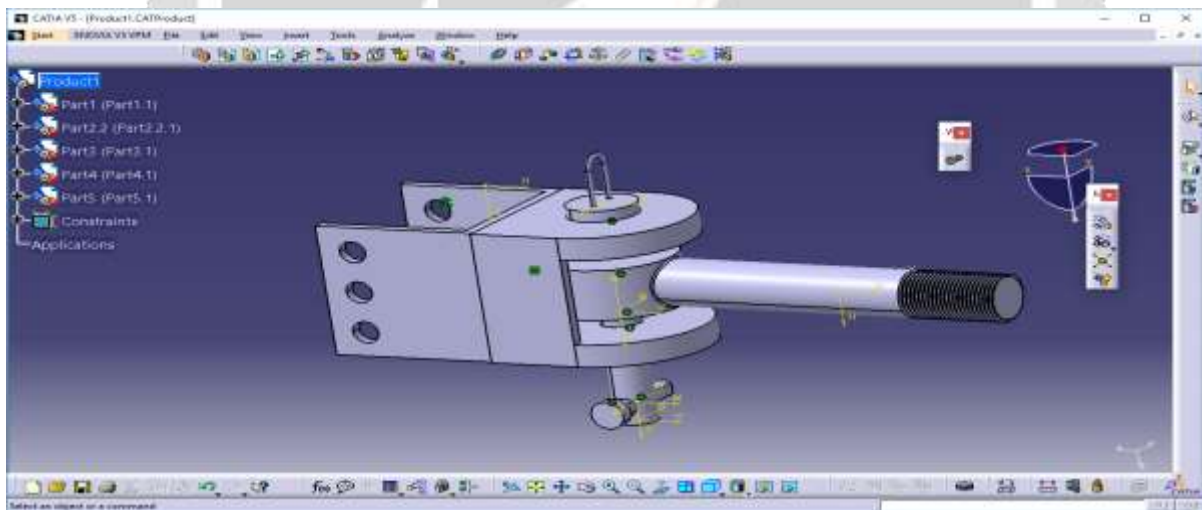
CATIA Model of Assembly of Knuckle Joint
